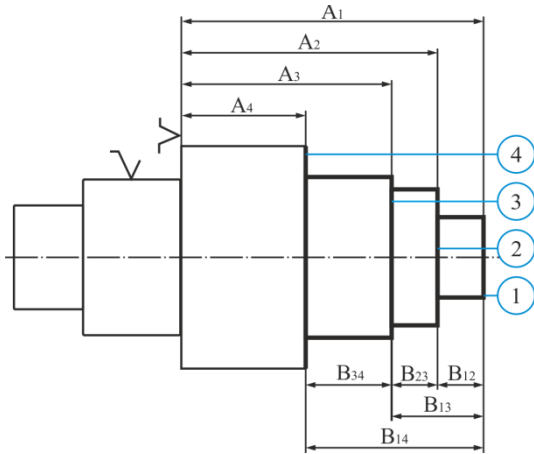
Dimensioning of a stepped shaft for processing parts on a CNC lathe ($A_1 = 31^{+0,1}$; $A_2 = 26^{+0,1}$; $A_3 = 22^{+0,1}$; $A_4 = 13^{+0,1}$).
